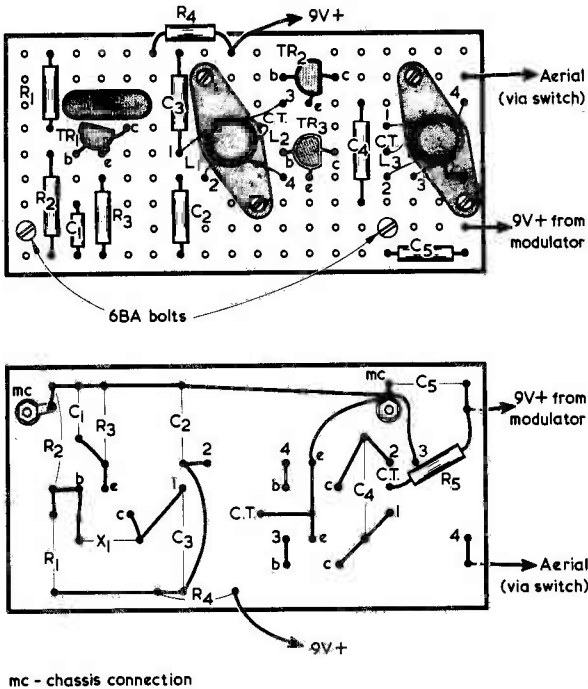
Wiring details for the Veroboard panel on which are mounted the components for the r.f. section of the transmitter
